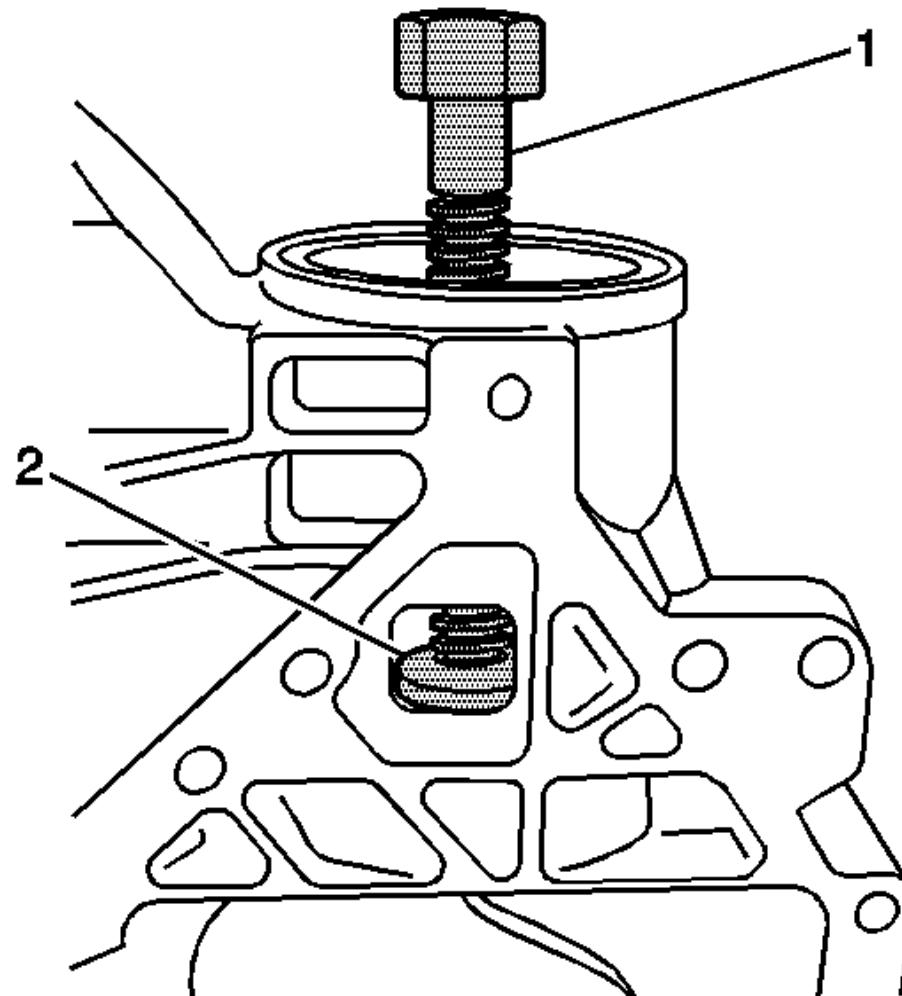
View Of J 45754 Forcing Screw Into J 45754-3
